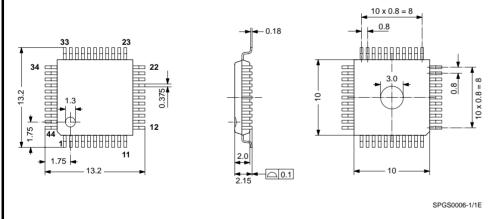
44-Pin Plastic Quad Flat Package (PQFP44) Weight approx 0.4 g Dimensions in mm
